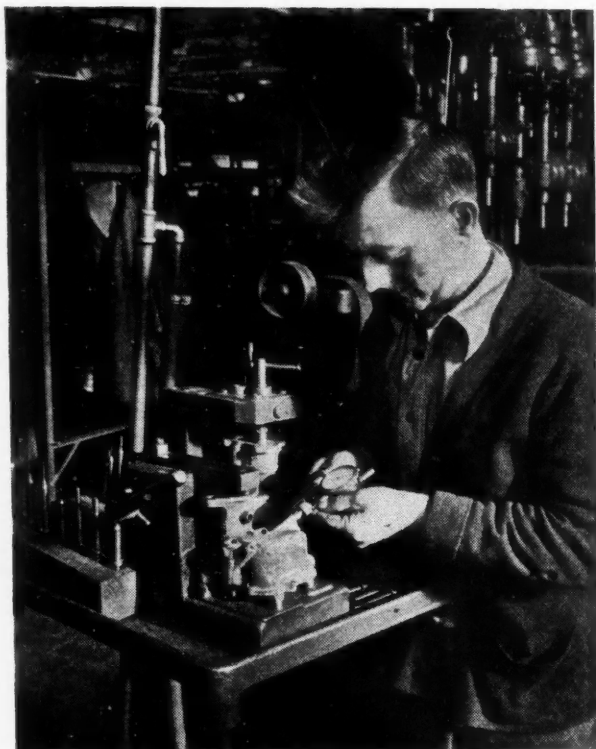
One of the inspection gages for checking machined carburetor bodies
